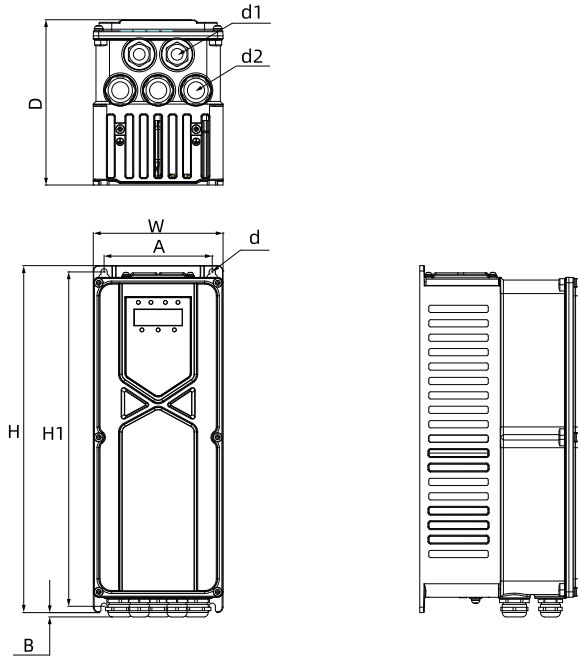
Overall and mounting dimensions for T1 to T2 (7.5 kW to 30 kW) models
